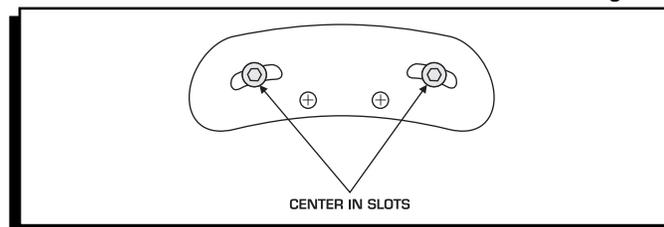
Positioning the Pickup Assembly of a Briggs & Stratton Engine.
